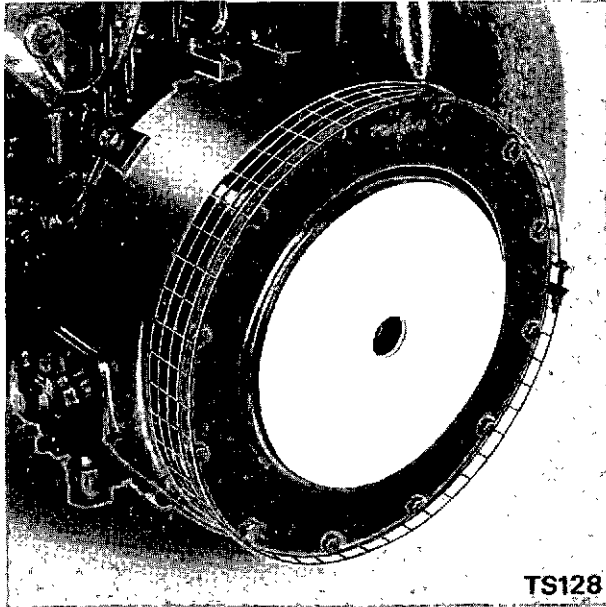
Hydraulic Pump Adaptor – Flywheel End.
